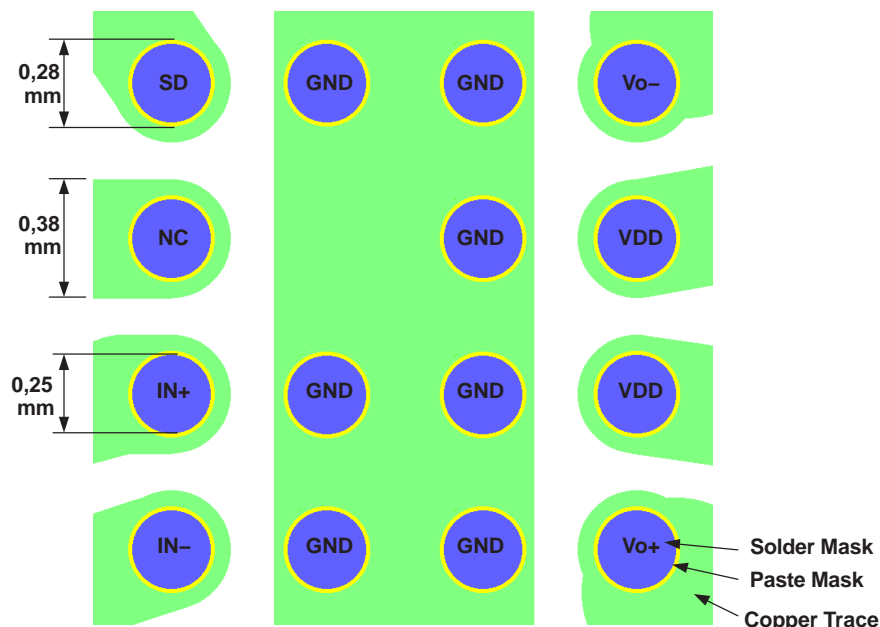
TPA2005D1 MicroStar Junior BGA Board Layout (Top View)
